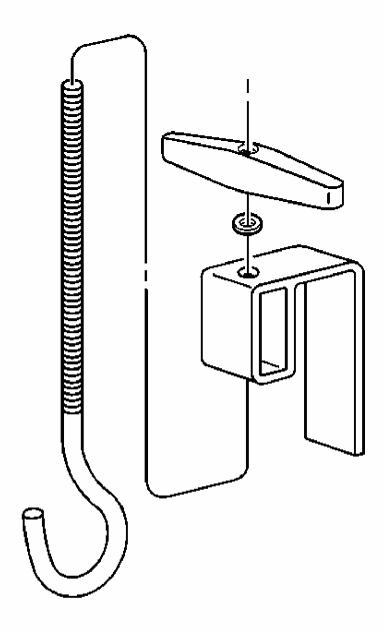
View Of Lift Hook Assembly Courtesy of GENERAL MOTORS CORP.
